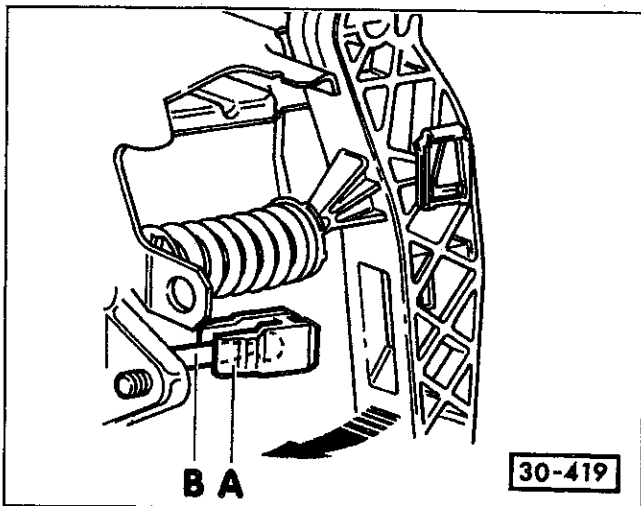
When engaging master cylinder pushrod to clutch pedal, make sure retainer (A) is installed on pushrod (B). To engage retainer to pedal, depress pedal. Make sure retainer locks in pedal.
